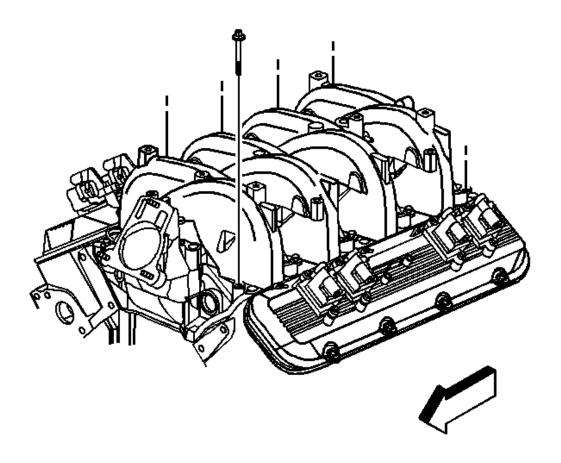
View Of Fuel Injection Rail Courtesy of GENERAL MOTORS CORP.
